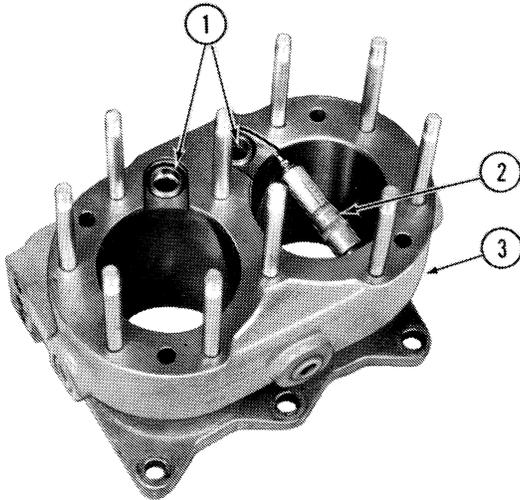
CHECKING CYLINDER BORE FOR ROUNDNESS T-28934
